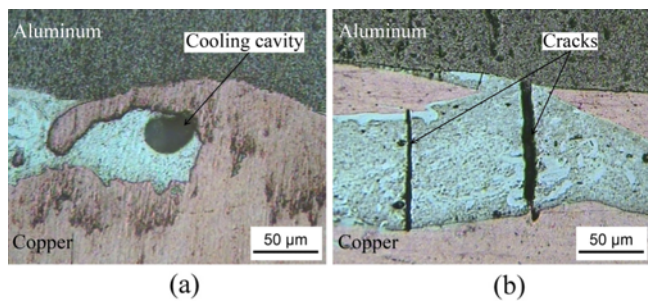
Typical defects observed in explosively welded joints: (a) cooling cavity and (b) cracking.
